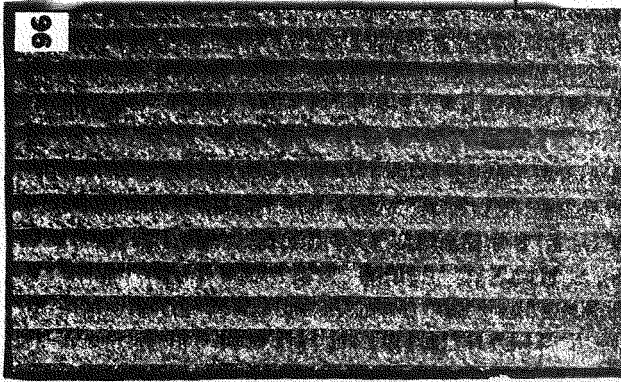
INCONEL FM72 overlays on 304L after exposure.
